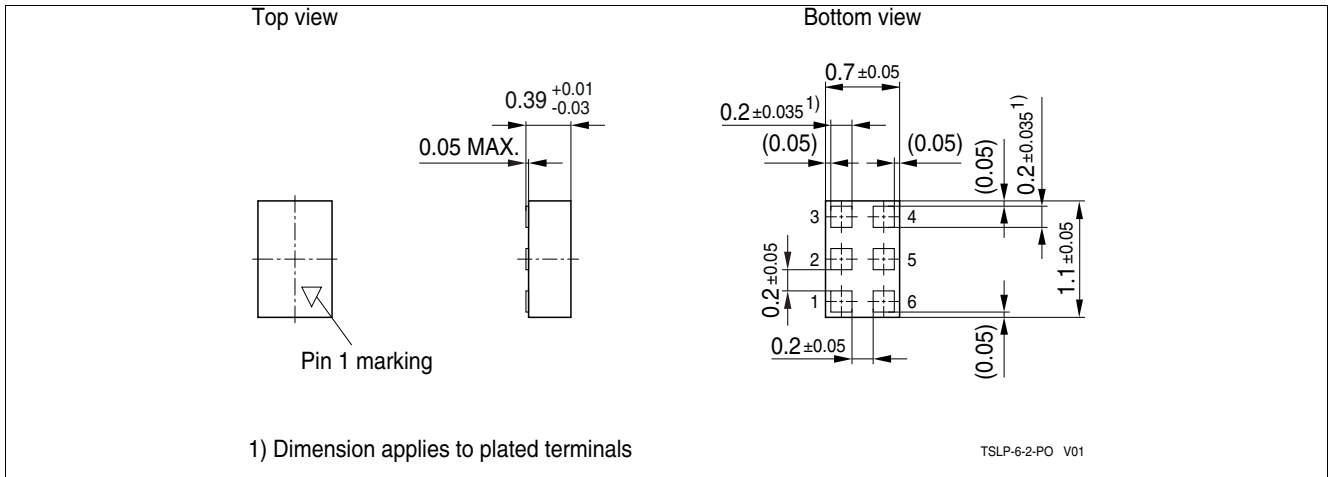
TSLP-6-2 Package Outline (top, side and bottom views)
